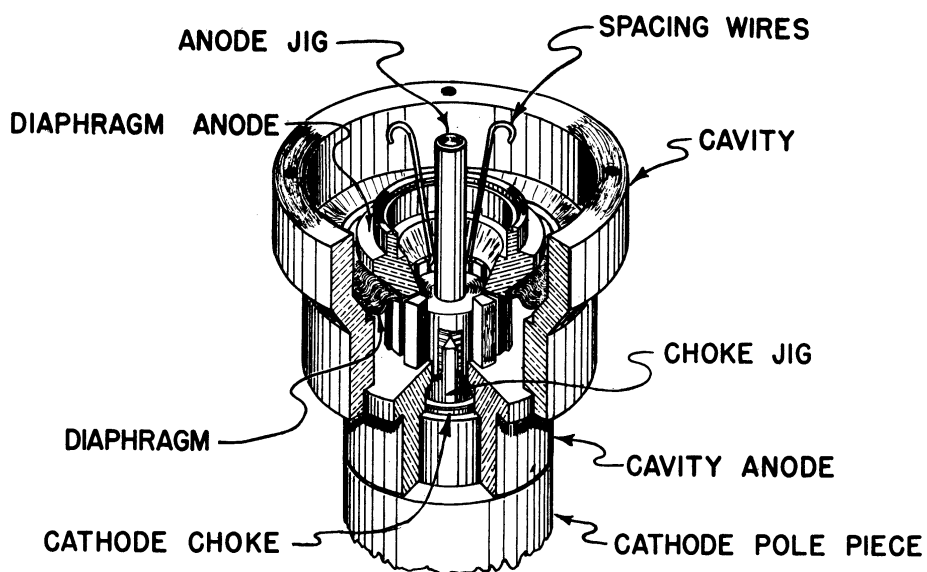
B UPPER ASSEMBLY OF 1<sup>st</sup>. BRAZE JIG
